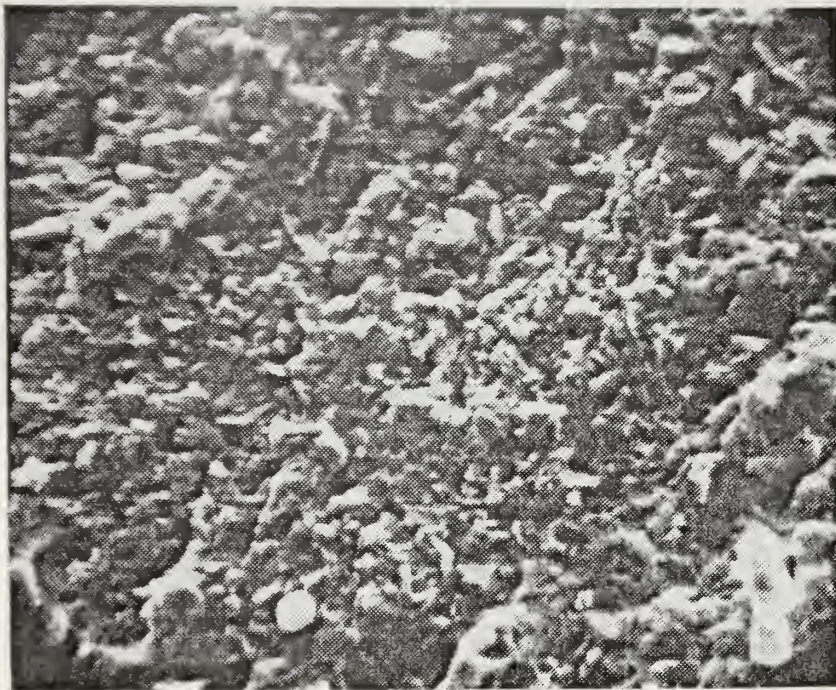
Higher magnification view of Fig. 80 fractograph in the center of the fatigue zone, showing ductile and brittle fracture areas. Note both cleavage facets and dimples. X2200.
